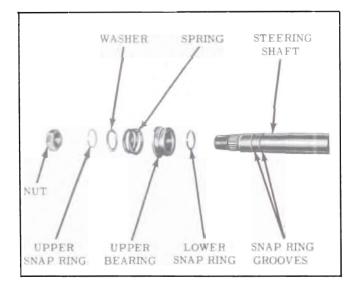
Steering Shaft Upper and Lower Snap Rings
